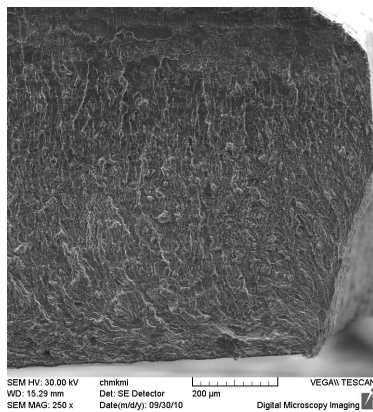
Fracture initiation from the corner side of the nitrooxidized steel sheet
